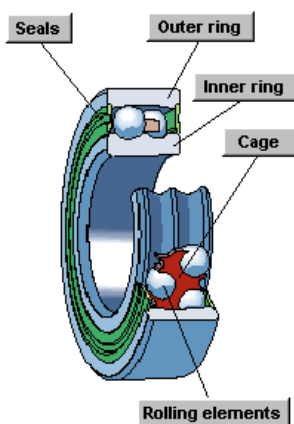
Components of the rolling bearing (SKF, 1996).
